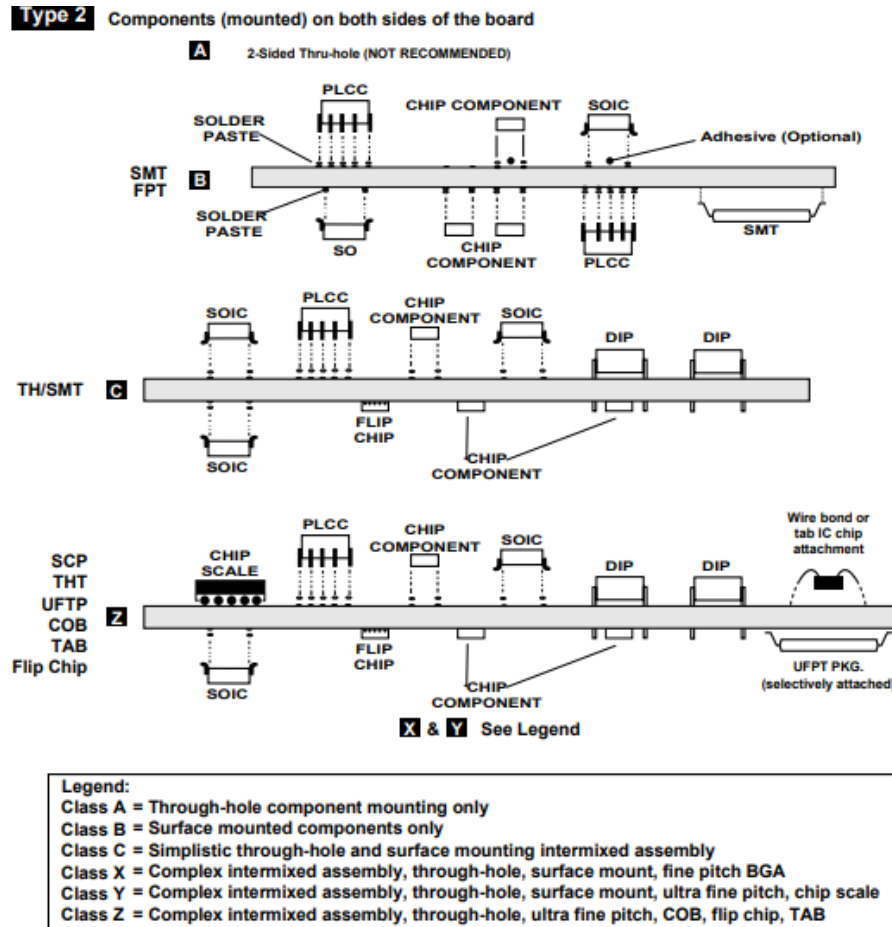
IPC-2222 standard for mounting components on both sides of the PCB. Image used from IPC-2222 [103].
